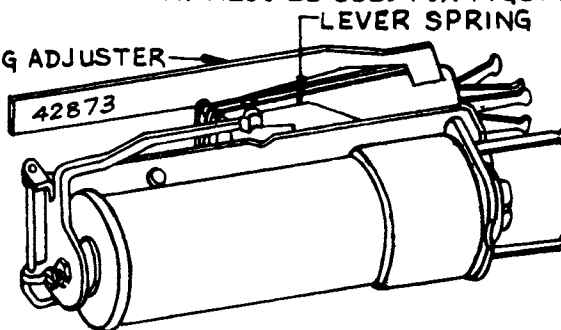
ADJUSTING LEVER SPRINGS FOR TENSION
